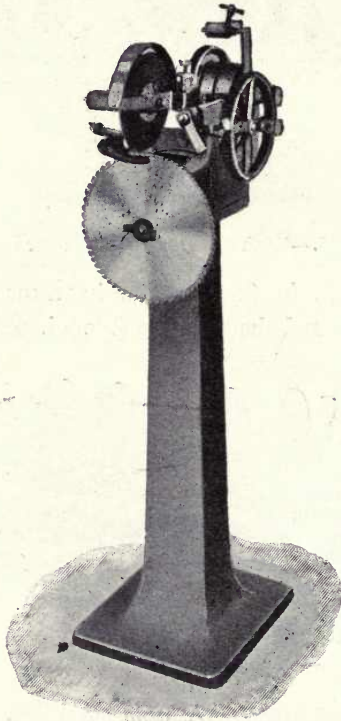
A.—Saw-sharpening Machine for Straight Cut, with Circular Saw. cold saws up to 5 feet in diameter and  $1\frac{1}{4}$  inch pitch. The clamping device with the circular saw to be sharpened can be easily and reliably raised by means of a threaded spindle.
